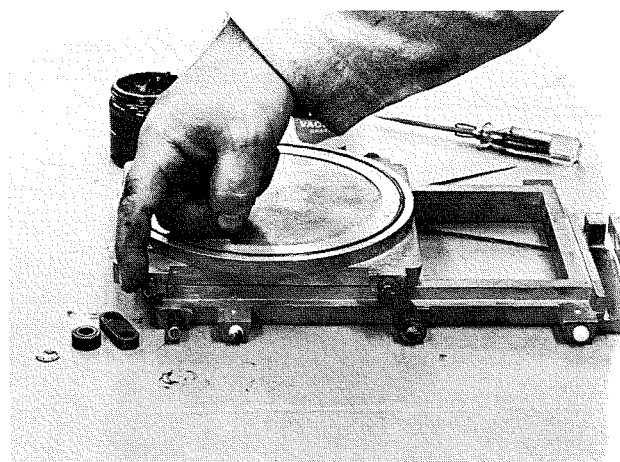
Lubrication of the gate-lifting links and carriage rollers of valve B.
